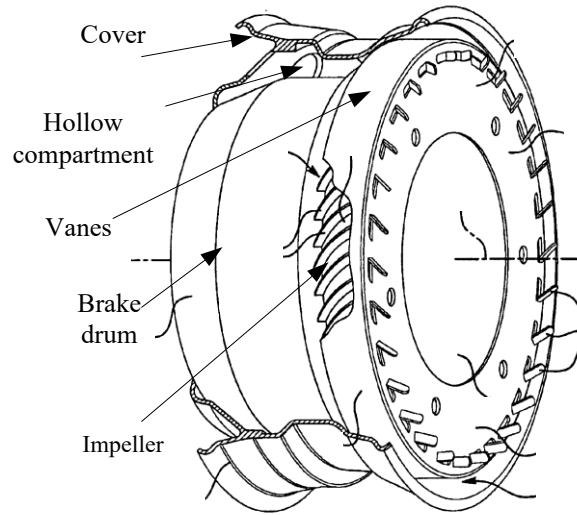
Brake drum cooling apparatus with impeller setup (image retrieved from [25]).
